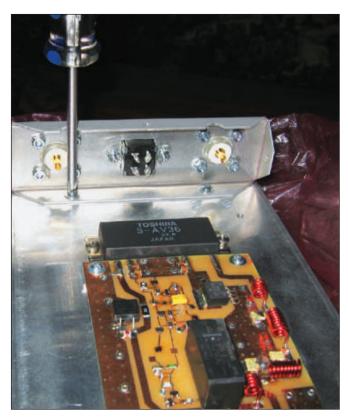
The rear panel is attached using #6-32 machine screws. The module connections are soldered to the PC board as shown.
